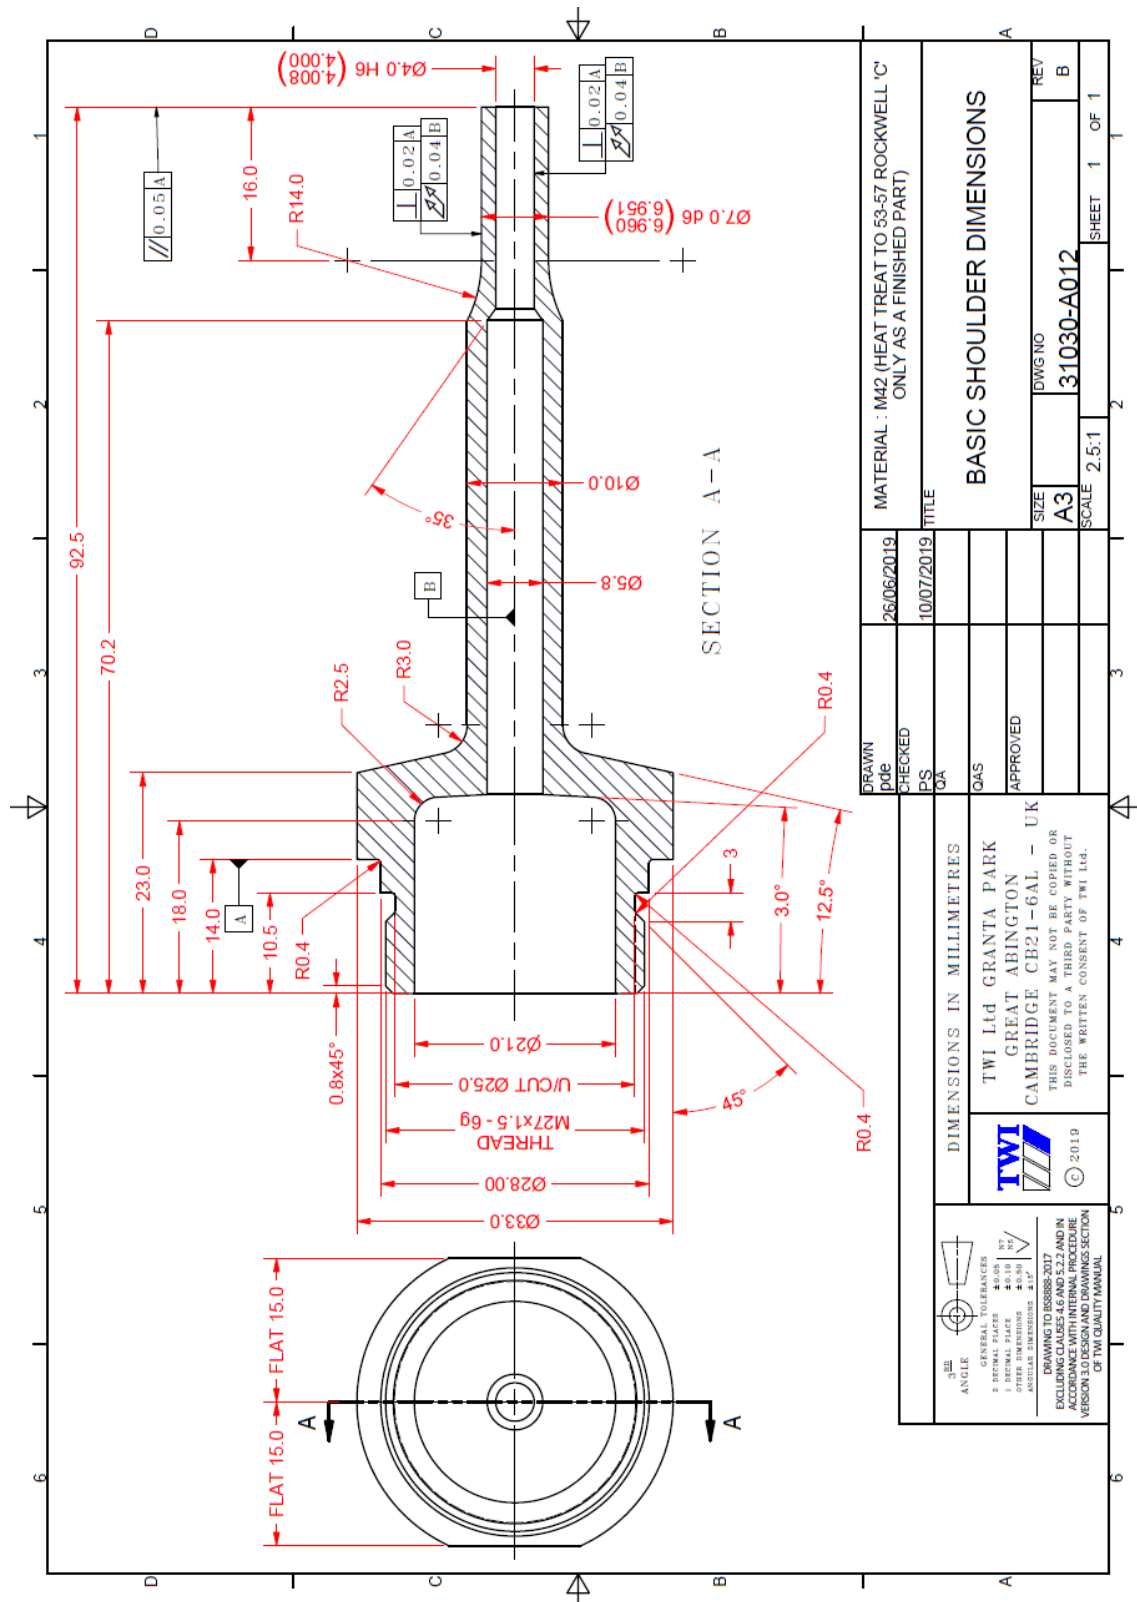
Technical drawing of the RFSSW featureless shoulder component. (Tool 2)
